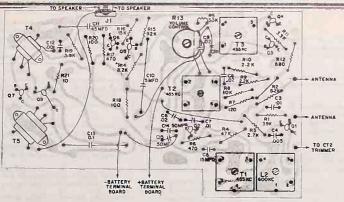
PRINTED CIRCUIT CHASSIS DIAGRAM
